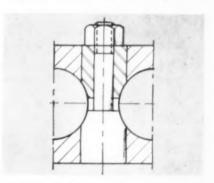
Two pieces may be simultaneously clamped with the design shown herewith.
